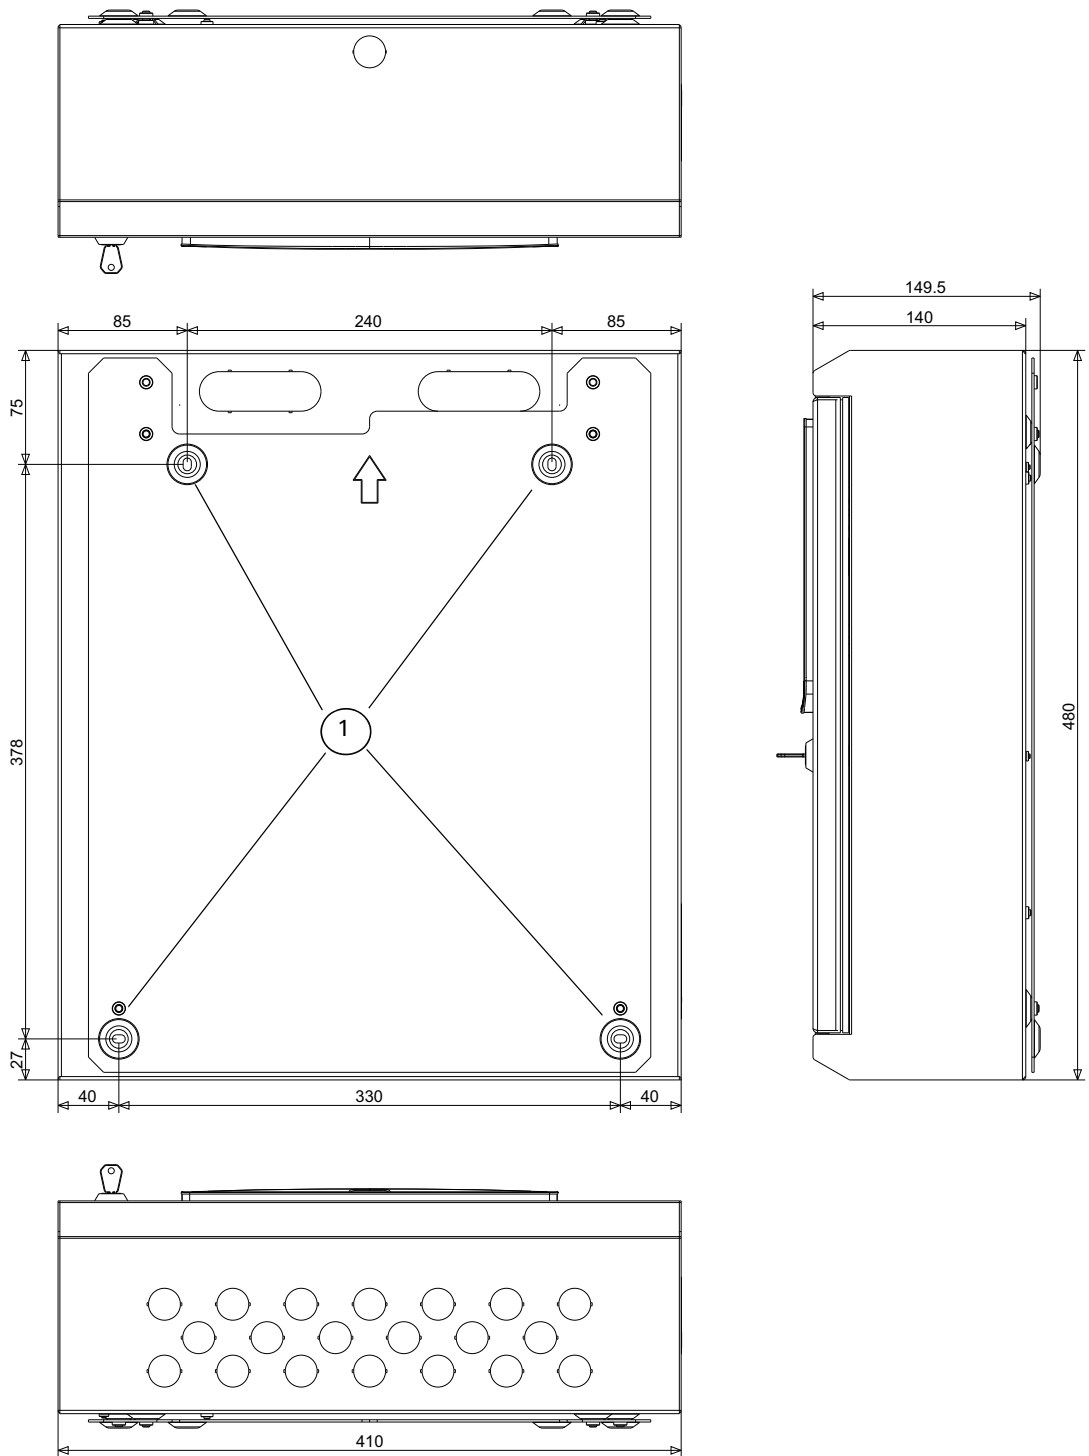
FC702S- Mounting plate fixing and overall dimensions in mm
